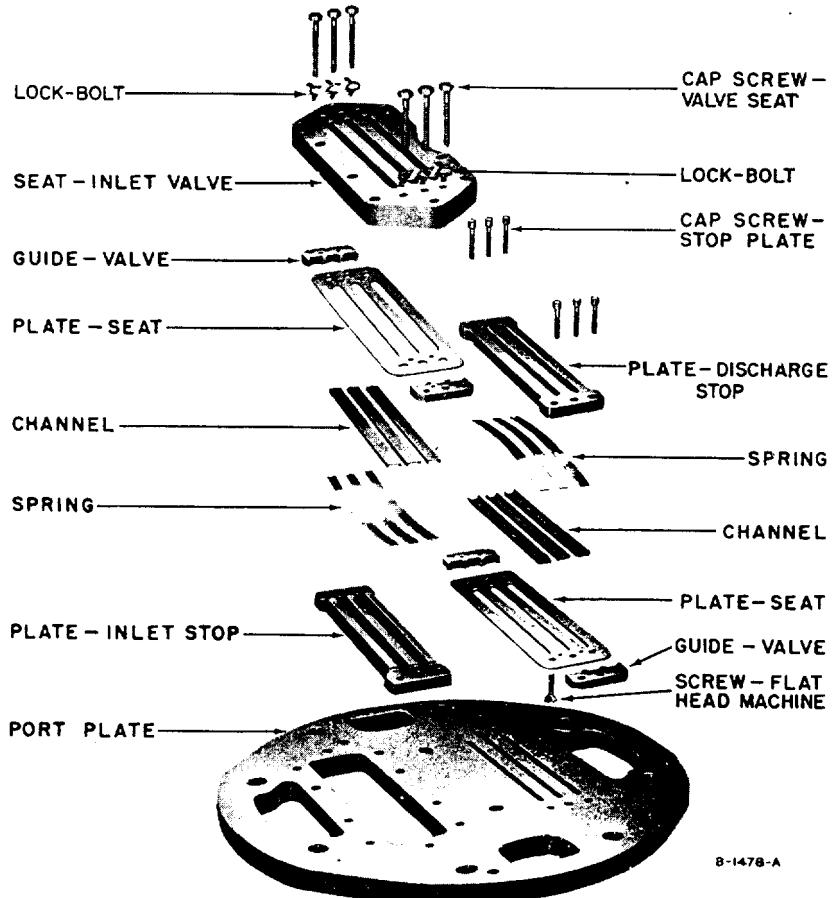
R-1—View showing typical Type "A" rectangular inlet and discharge channel valve.
